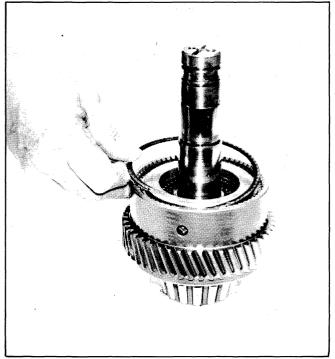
Removing or Installing the Internal Retaining Snap Ring on the Housing Gear.
